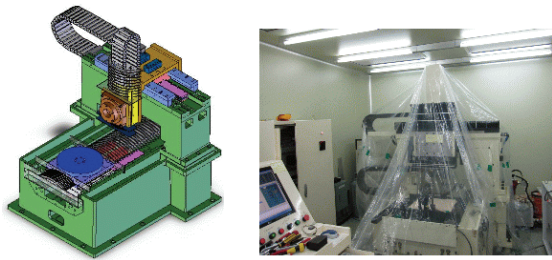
The 4-axis machine tool (1,300 × 1,800 mm<sup>2</sup>) which is adopting hydrostatic bearings. The machine is composed of three linear axes and one rotary axis
